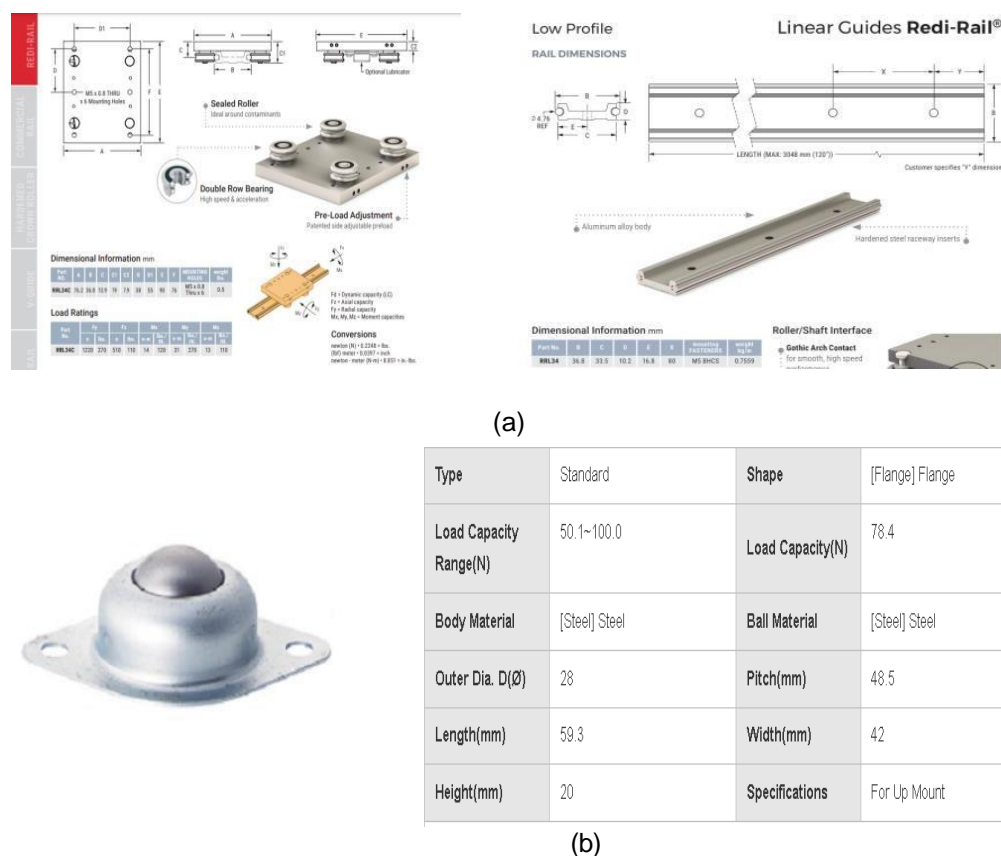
(a) Rail slider part reference, (b) reference for ball roller parts for support plat clamping jig
